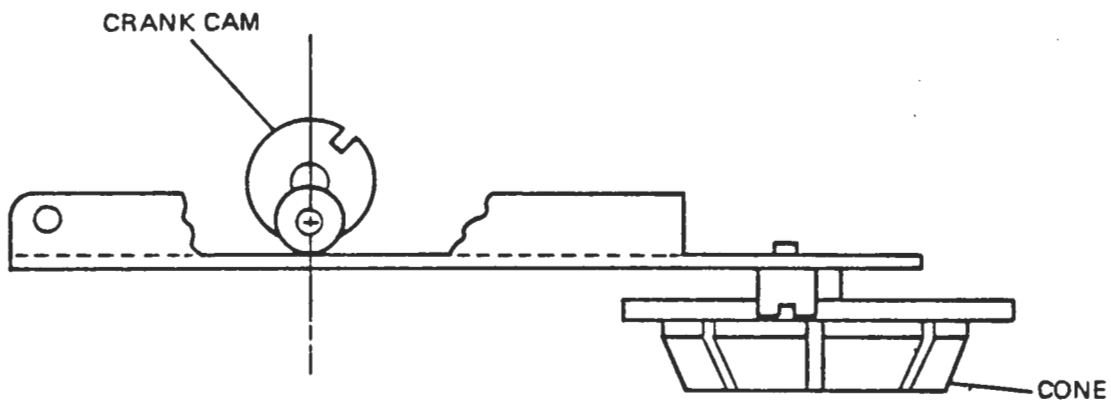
B. Eject Motor Cam Alignment Check - Carrier Closed
